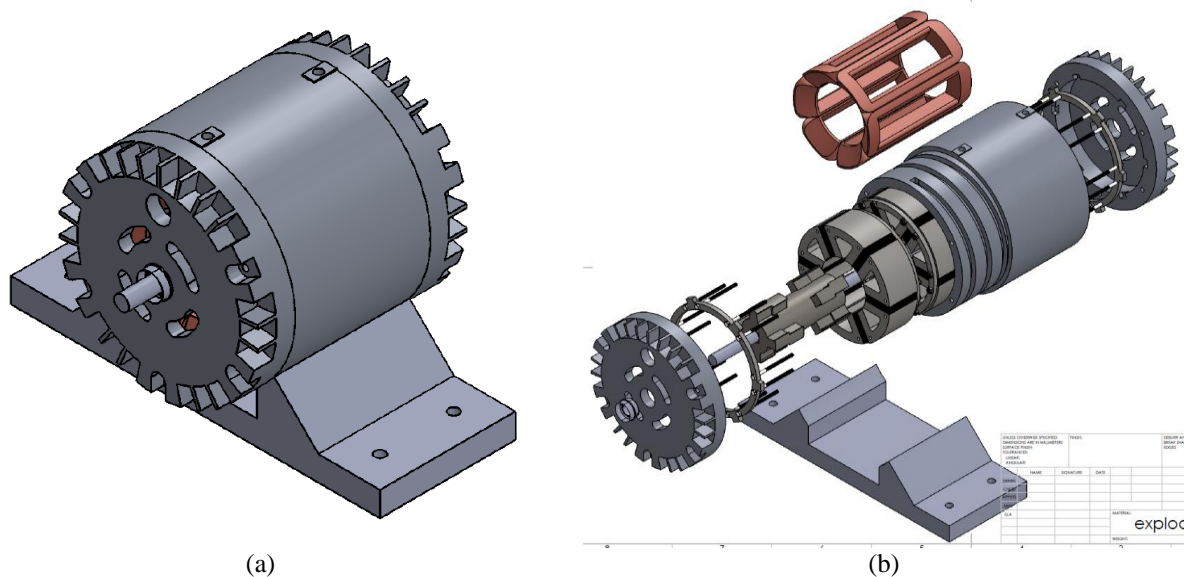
CAD print of the overall machine design (a) assembled machine (b) exploded view
